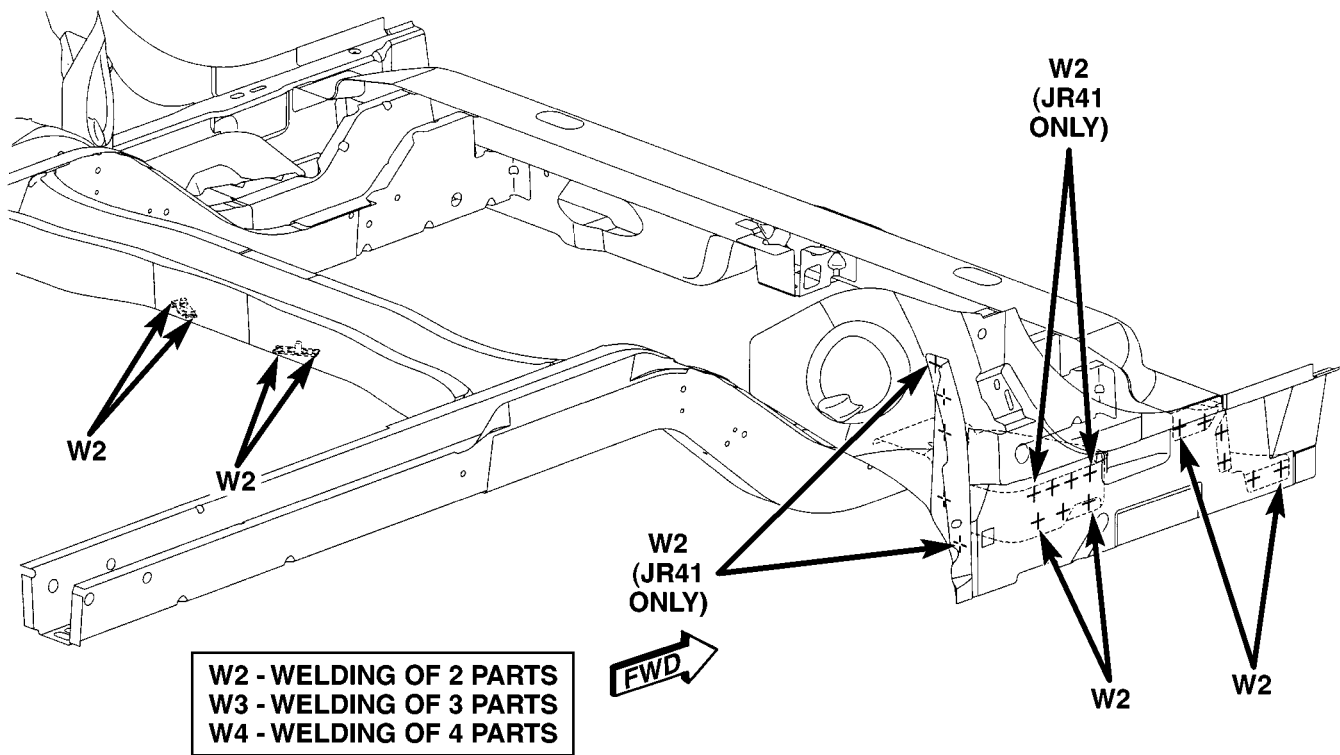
WELD STUD TO SEAT BELT ANCHOR REINFORCEMENT & SPARE WHEEL BRACKET
